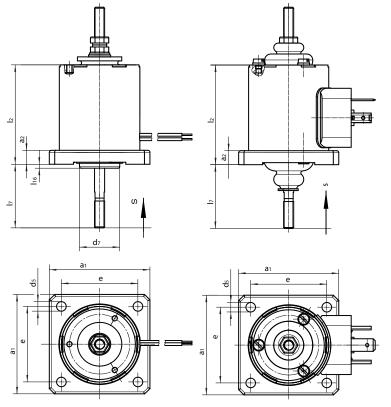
G TC A 040 X20 A02 to G TC A 100 X20 A02 (missing dimensions see fig. 5)
